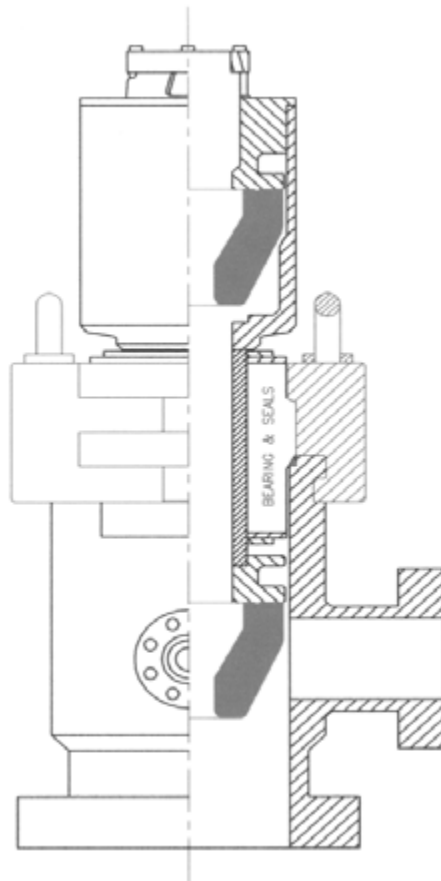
Cut-a-way view of a rotating head with dual stripper rubbers (courtesy of Williams Tool Company).
